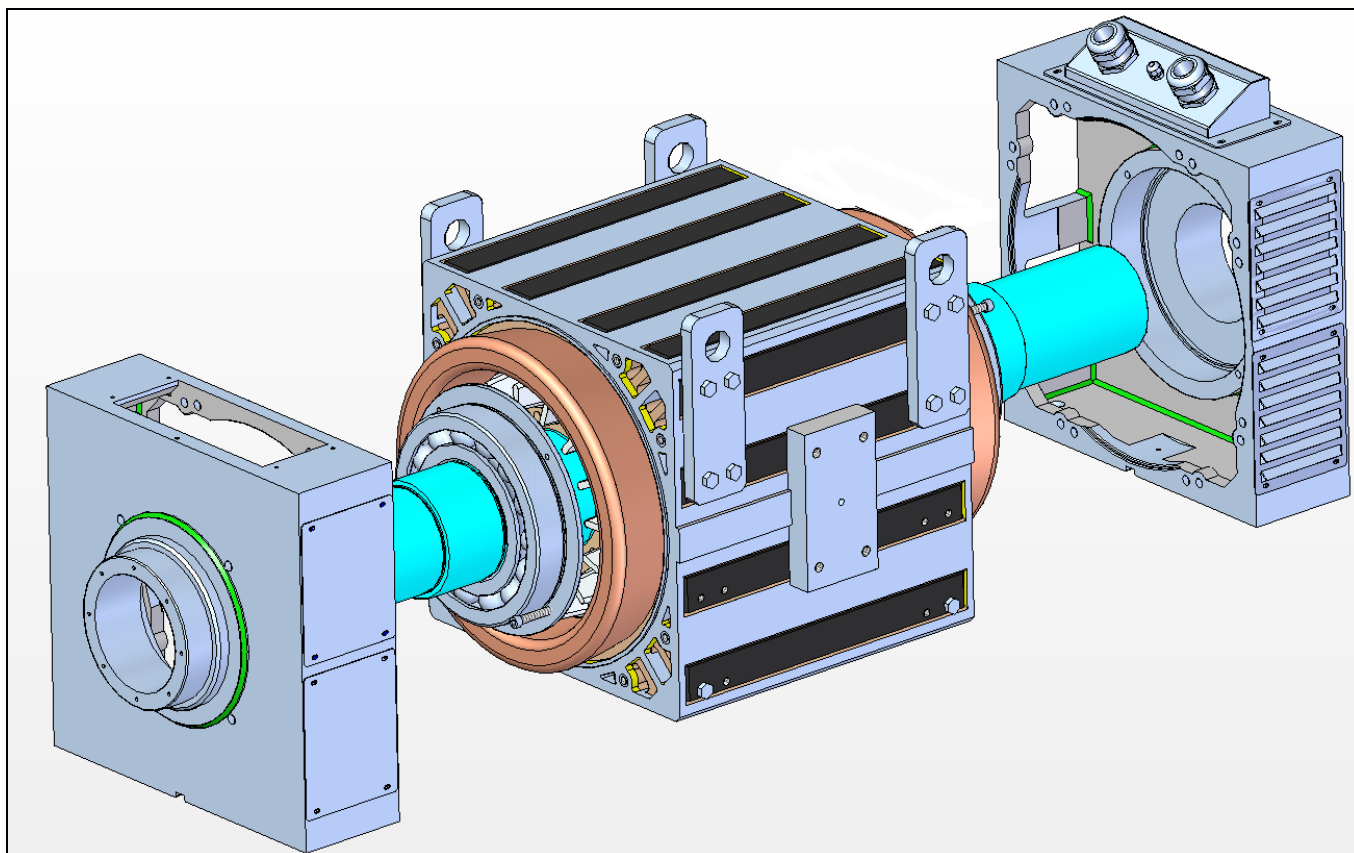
Replacing bearings on MAC-Q motors (step 3 and 4)
